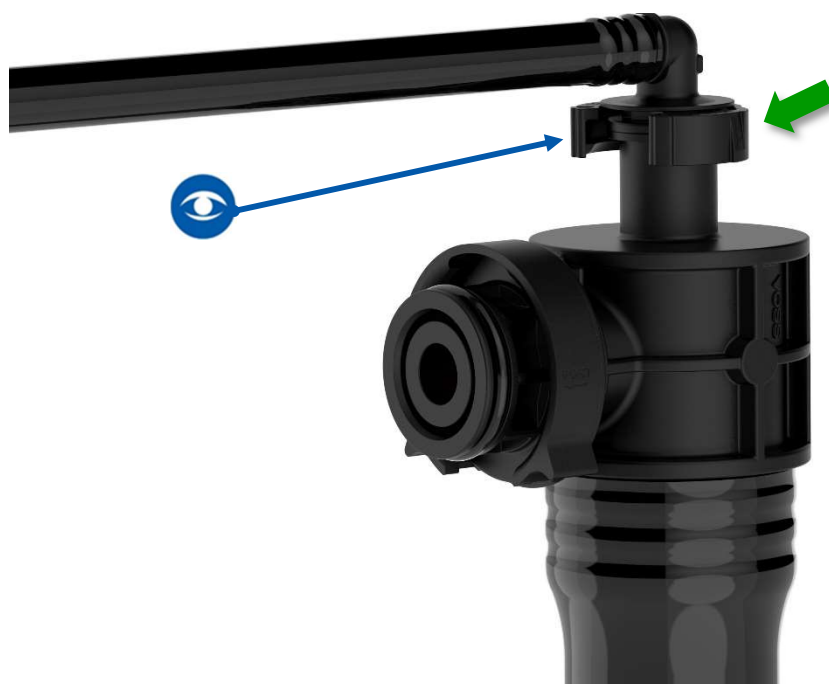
Opening the retaining element of QC system 246^{NX}
